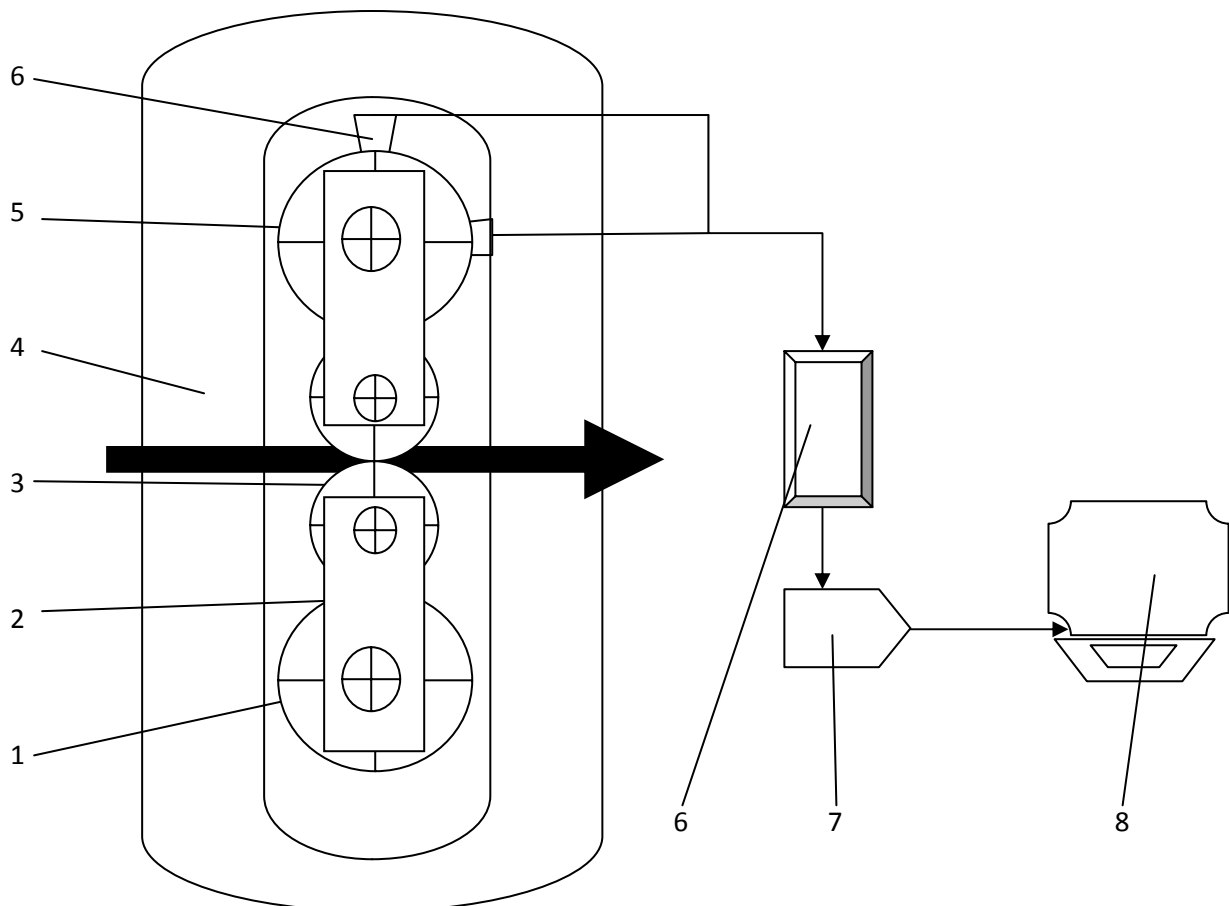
Schedule for parameters measured in the cold rolling mill machine: 1-work roll; 2-rolls support; 3-beckup roll; 4-mill stand (frame); 5-horizontal accelerometer; 6-vertical accelerometer; 7-signal preamplifier; 8-process computer
